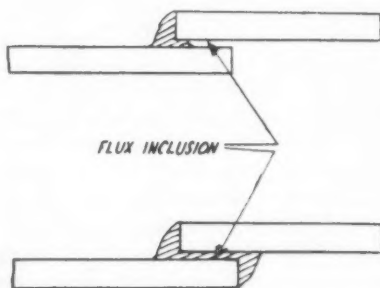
Lap joints in welding sheets show the flux inclusions.
